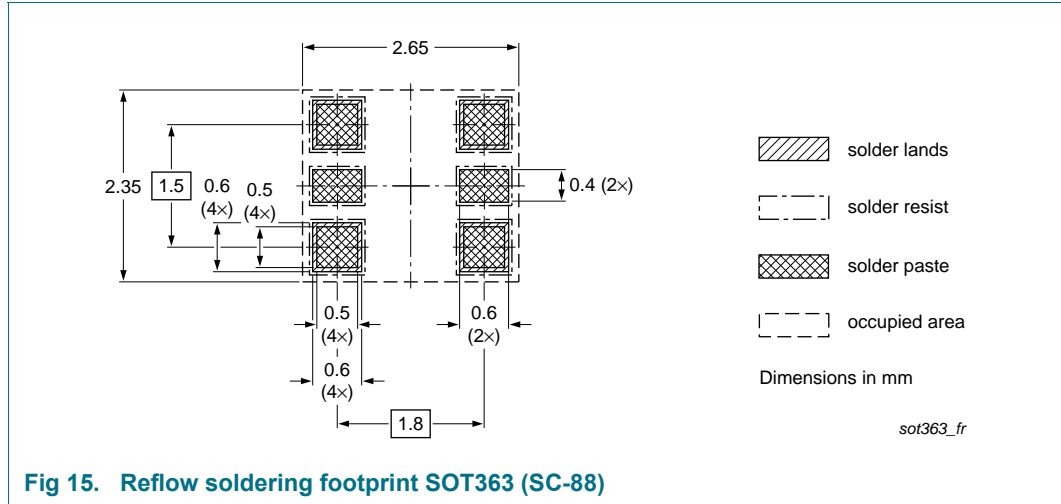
Reflow soldering footprint SOT363 (SC-88)
